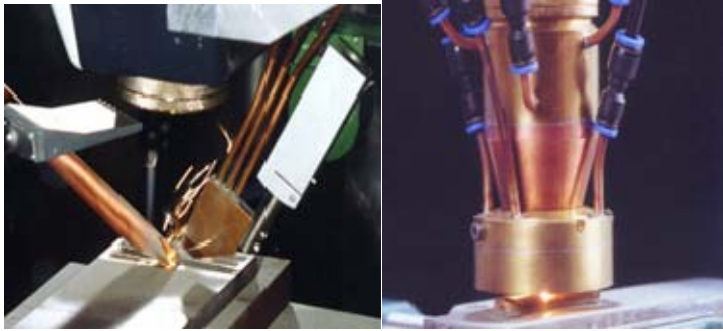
Additional shrouds for an improved shielding from oxidation during laser cladding; off-axis shroud (left) and coaxial shroud (right)
